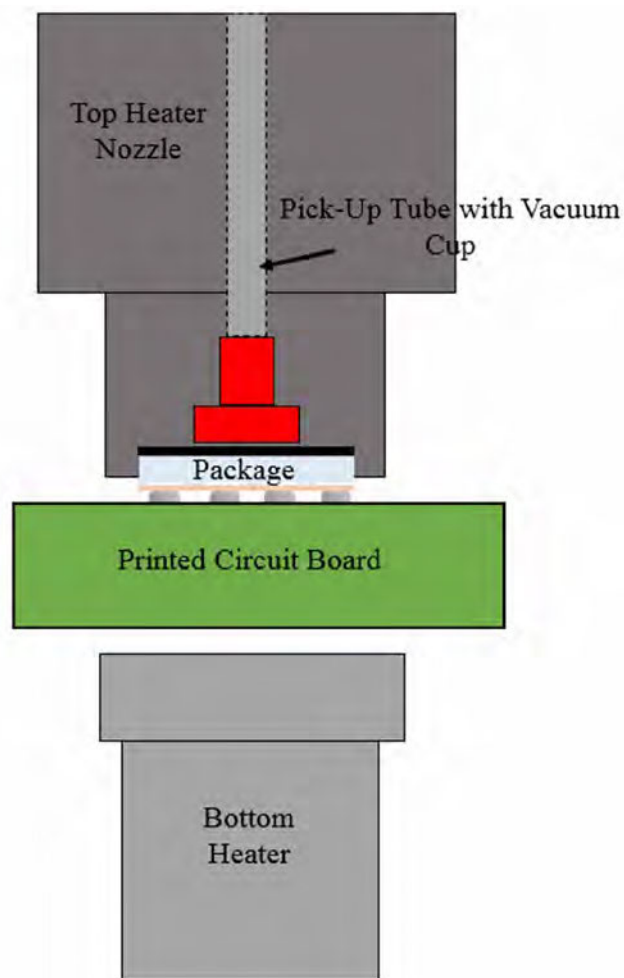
Schematic of set-up used to demount a WLP from a PCB.
